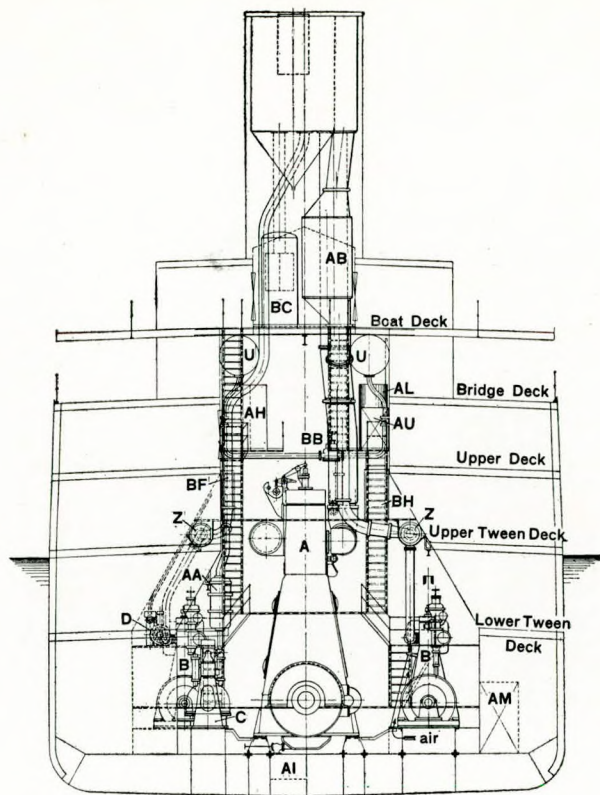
Machinery arrangement of twin screw Passenger Liner, "Christiaan Huygens."
